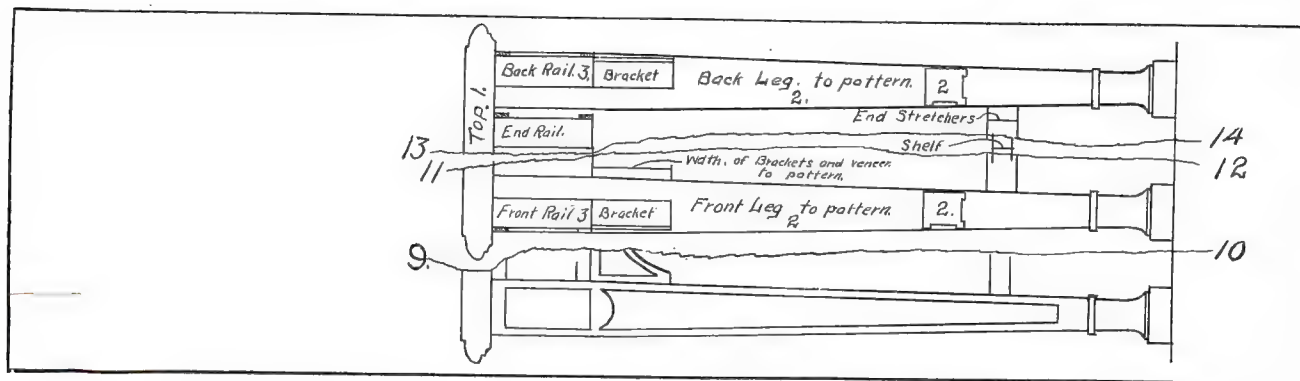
Other Side of Rod Showing "View of Heights" and Space for Cutting Bill.
